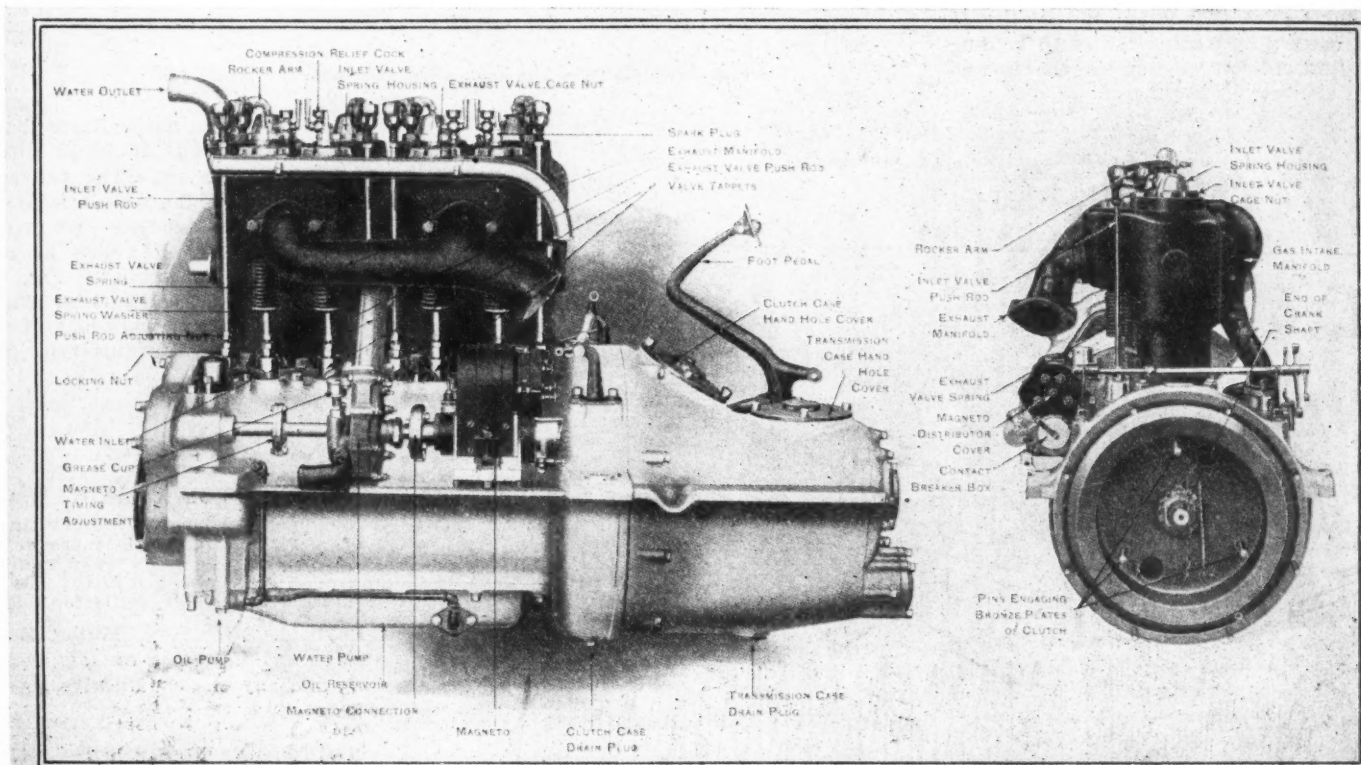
Illustration of the Chalmers 1912 engine for the purpose of installing lighting generator by cutting the auxiliary drive shaft and applying the proper fittings for the generator shaft connection this installation can be made
